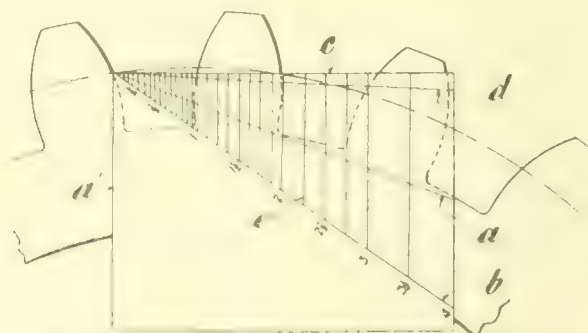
CRABTREE'S GAUGE FOR GEAR WHEELS.
